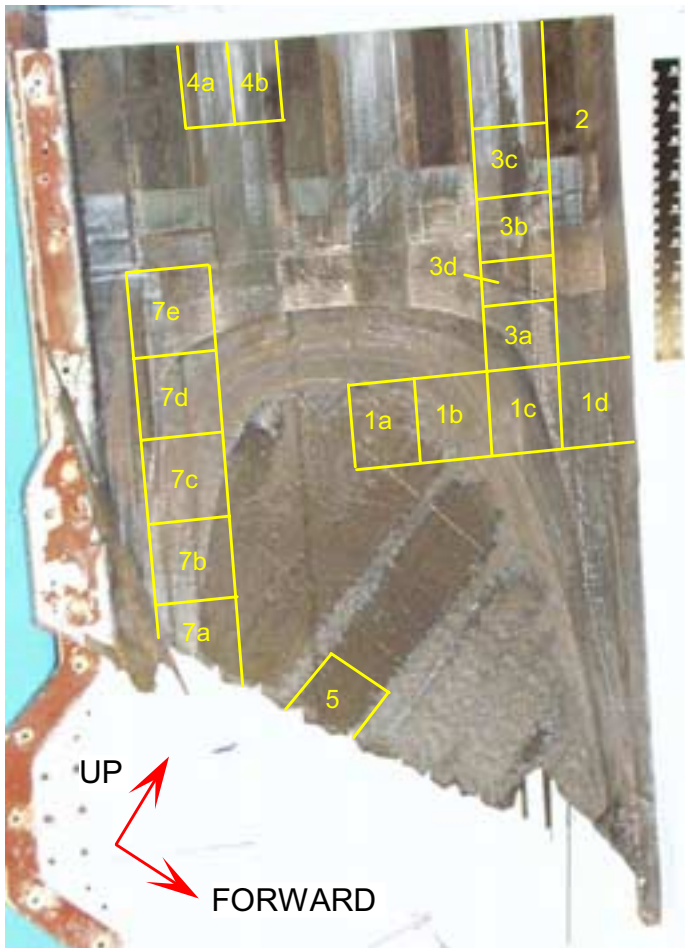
Specimens cut from the skin section at the left aft lug fracture area for examination using SEM.
